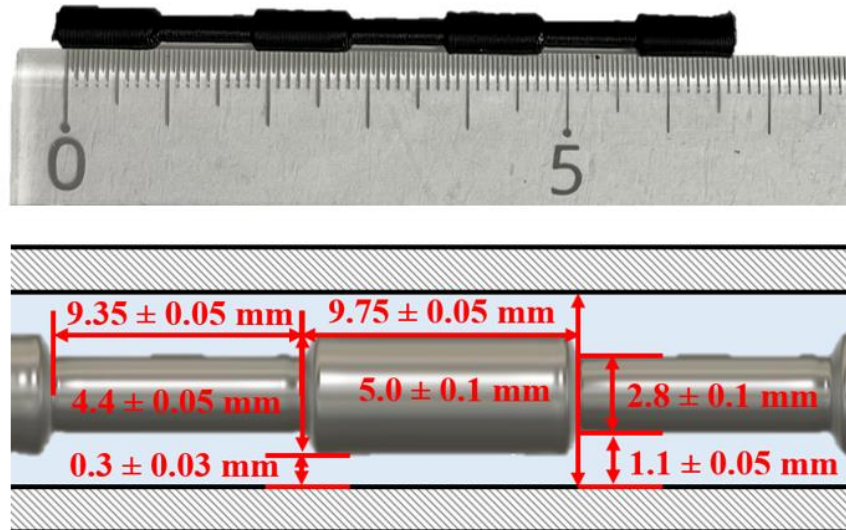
Schematic illustration of printed calibration rod with dimensional information.
